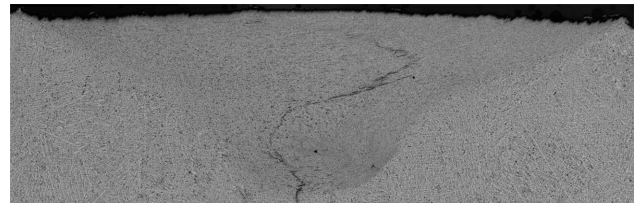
FSW weld structure. Welding parameters: no. 3 of Table 4
